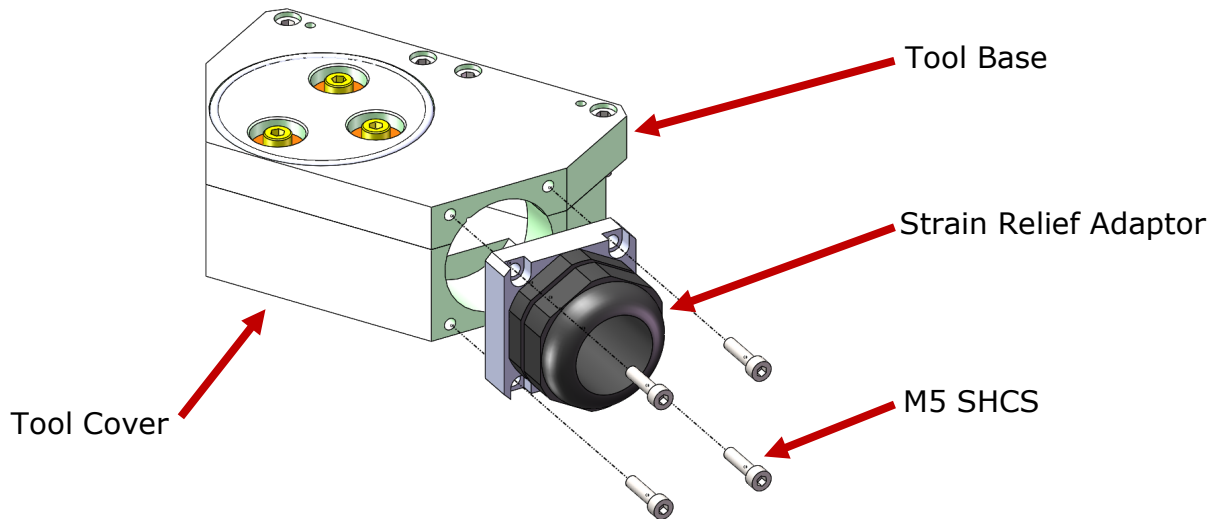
Remove/Install Strain Relief Adaptor
